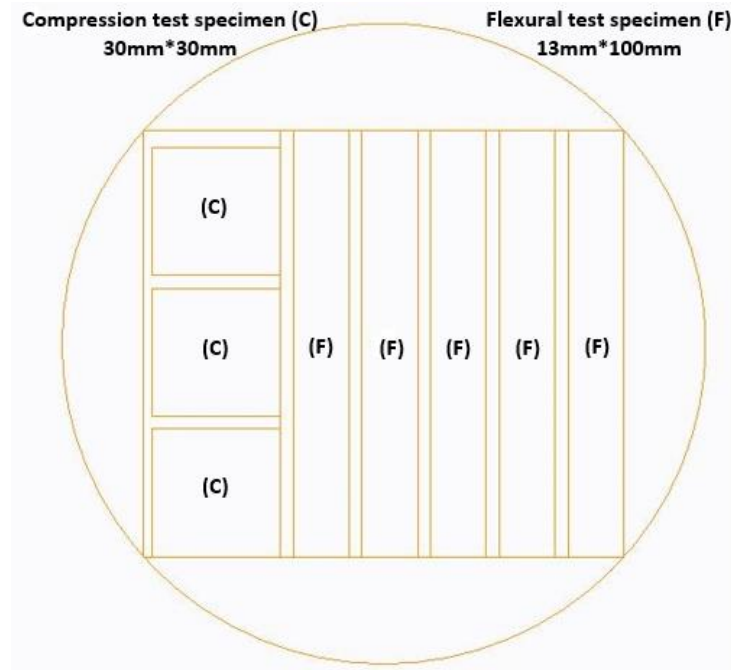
Cutting plan of test specimens from a circular disc, 150mm diameter, 13mm thick
